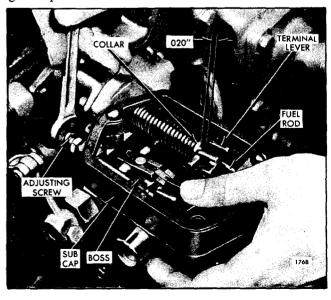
Setting Maximum Fuel Adjusting Screw (Load Limit)
